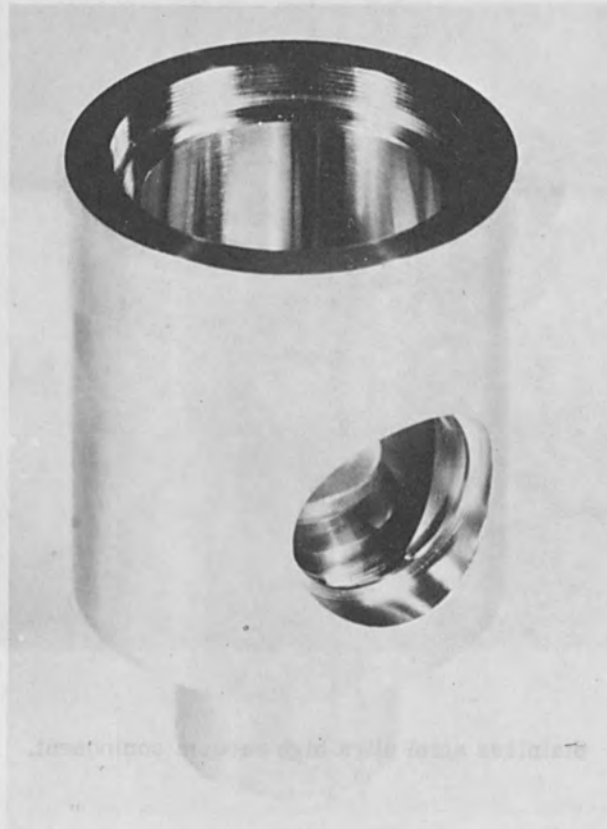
Ultra high vacuum valve welded in the bottom of the central bore.
